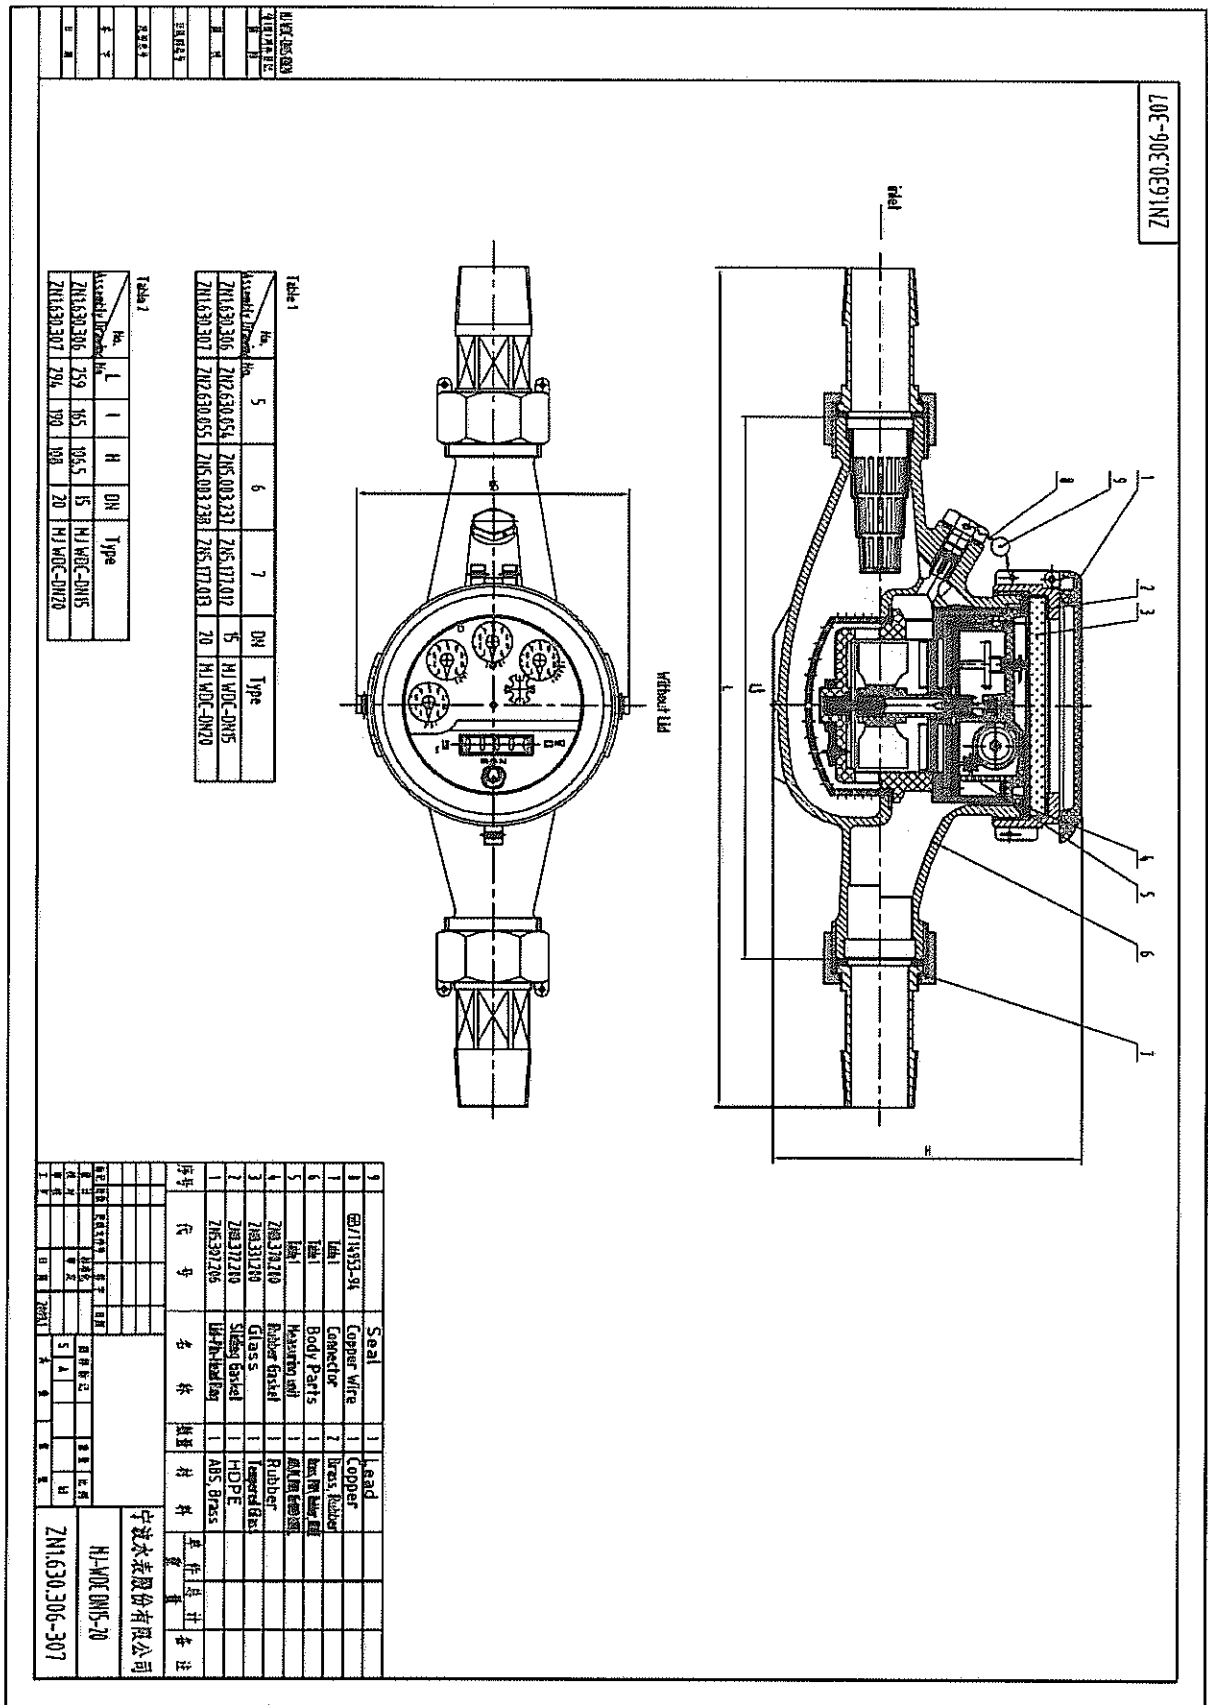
The water meter type MJ-LFC with reed impulse transmitter assembly drawings:
